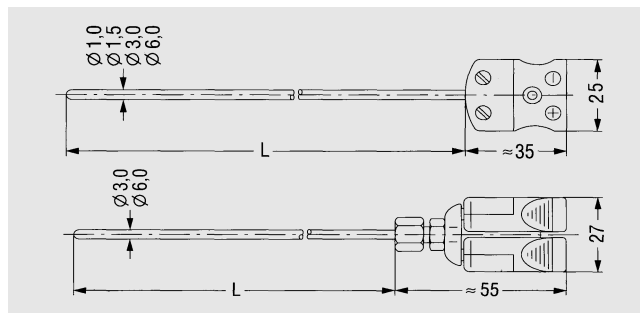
/8 Jacket thermocouple with socket; at top with one thermocouple, at bottom with two thermocouples; dimensions
